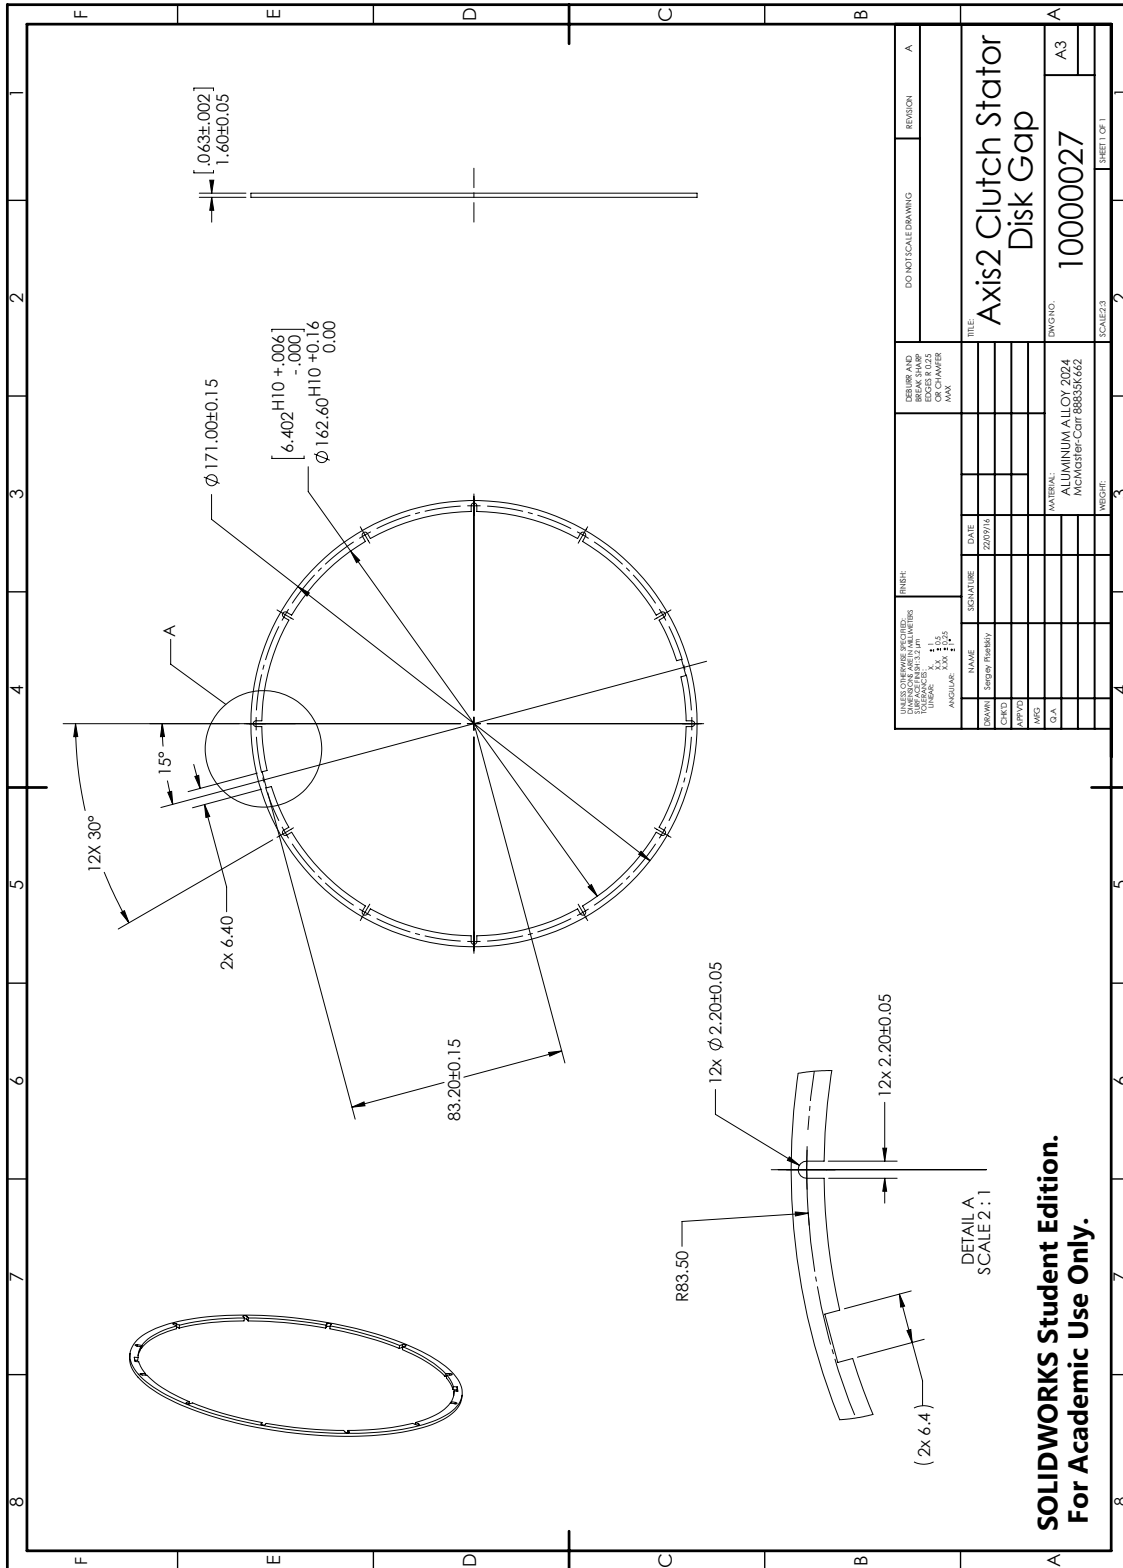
Drawing: Joint 2 clutch stator spacer.
